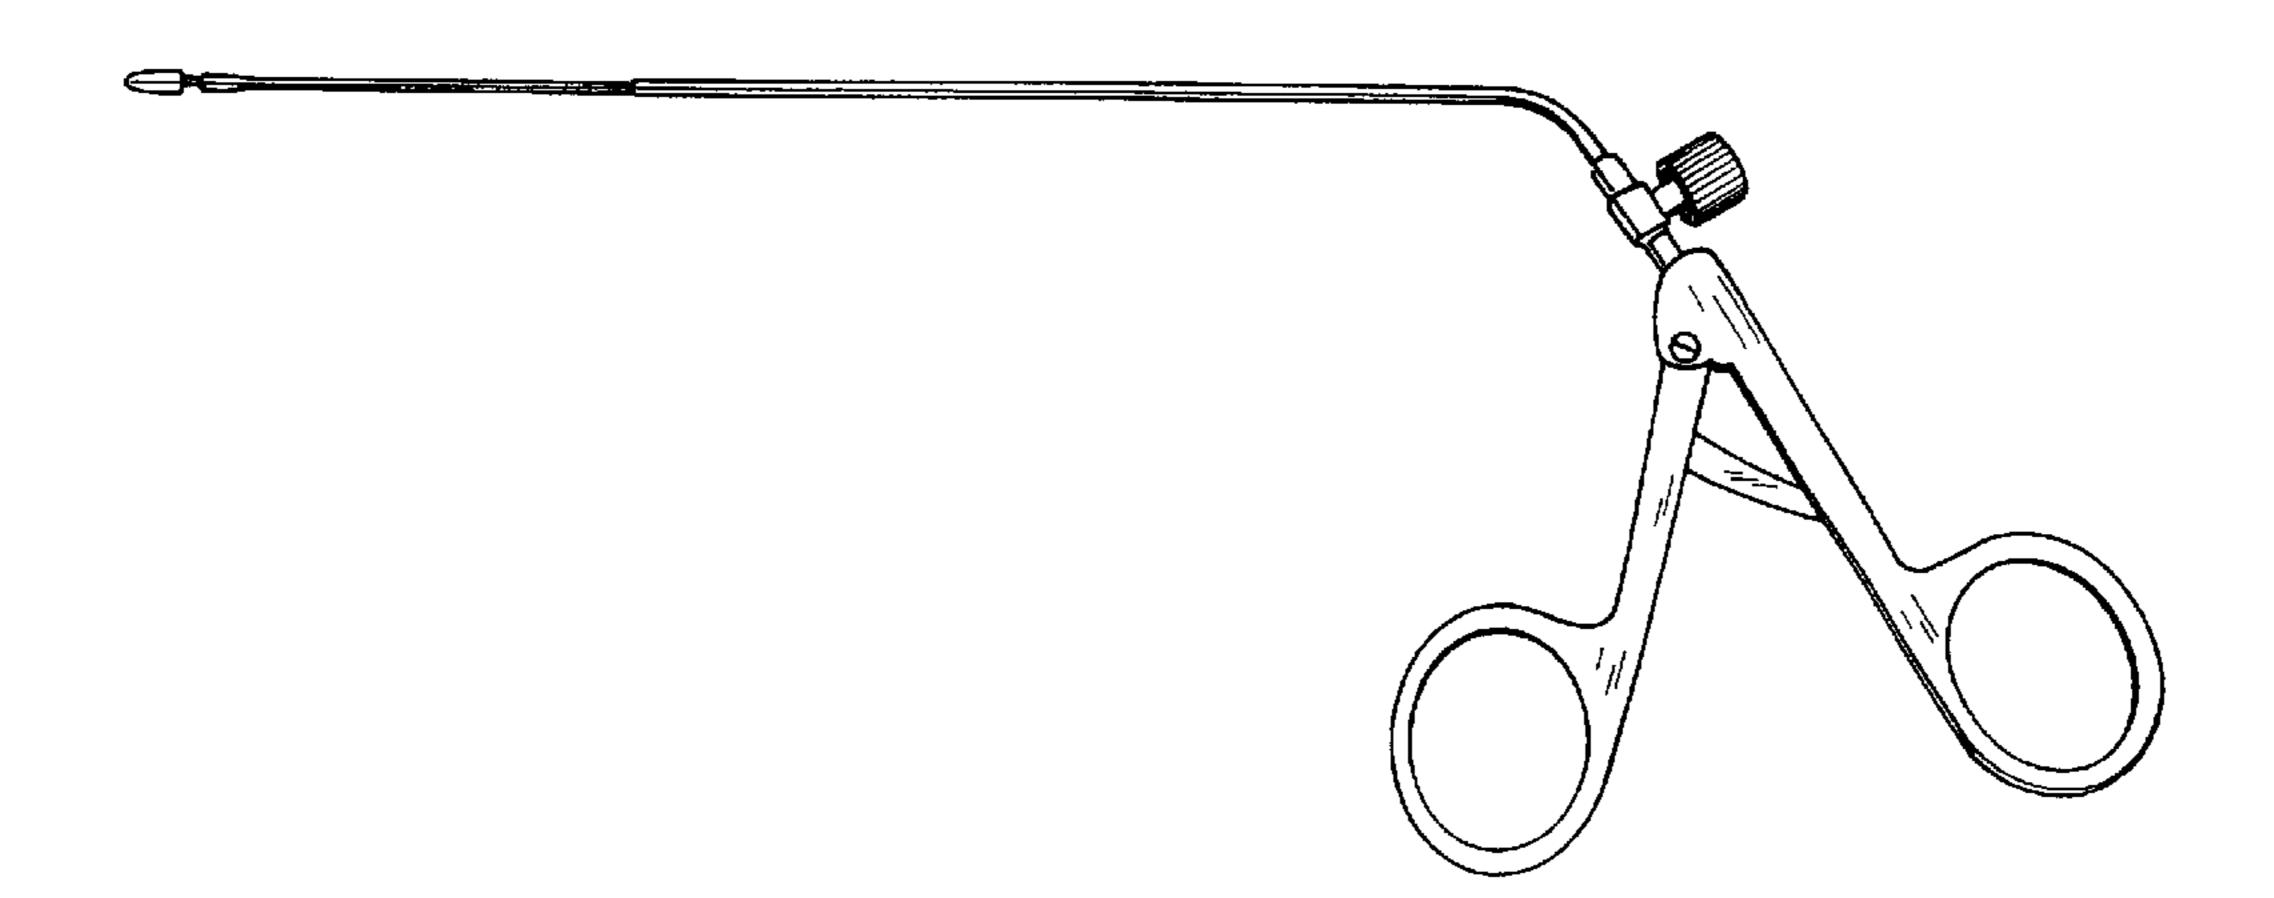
is a side view of the medical punch in a first operating state where the tool is open;
